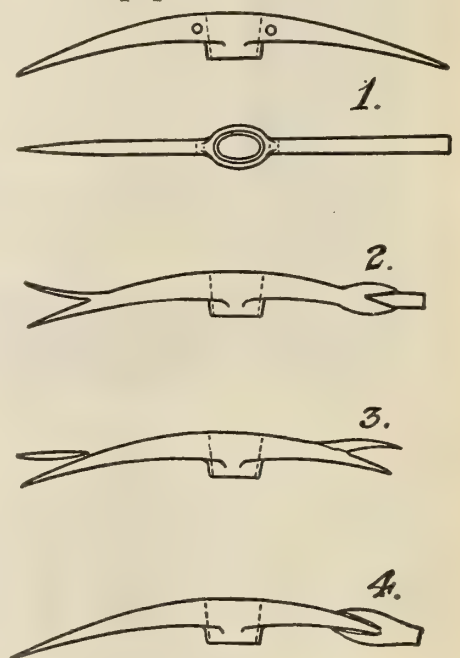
, at the right-hand side, shows one of the usual manners of doing this. The ends of the pick are split open for a little way, to take the point, which is made wedge shape at one end, and the whole welded together and brought to a point, as in fig. 1. But it was noticed that when these same energetic laborers used their picks for levers, they came back to the shop with the points missing, and wide open jaws, as shown to the left of fig. 2.
